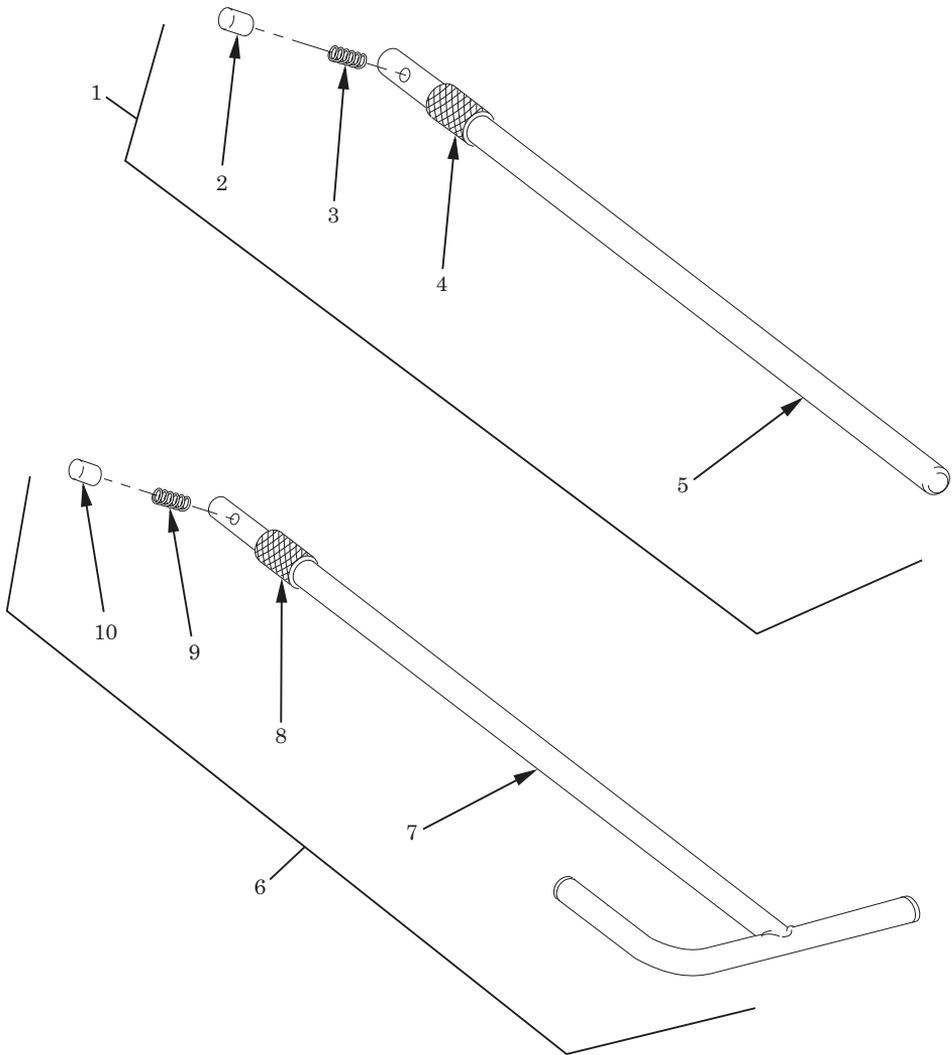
Artillery Cleaning Staff Assembly 12576922;
